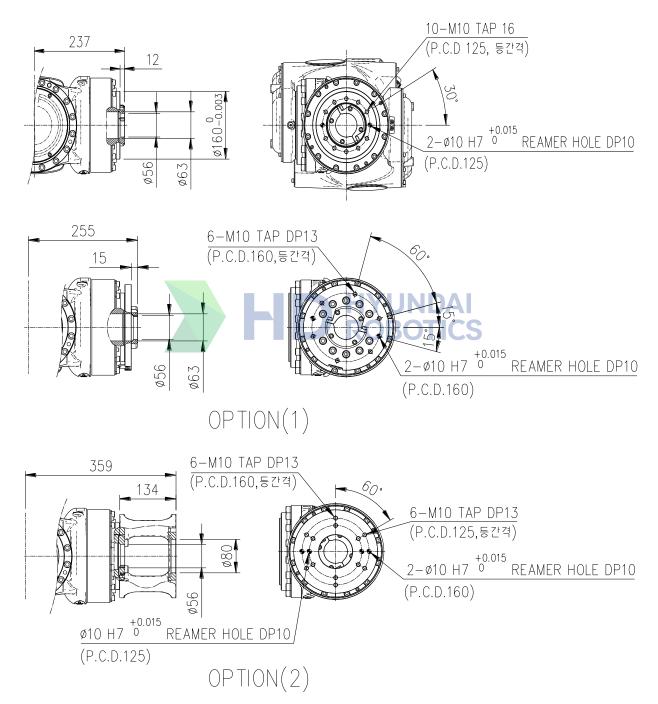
Detailed drawing of the wrist axis attachment surface
